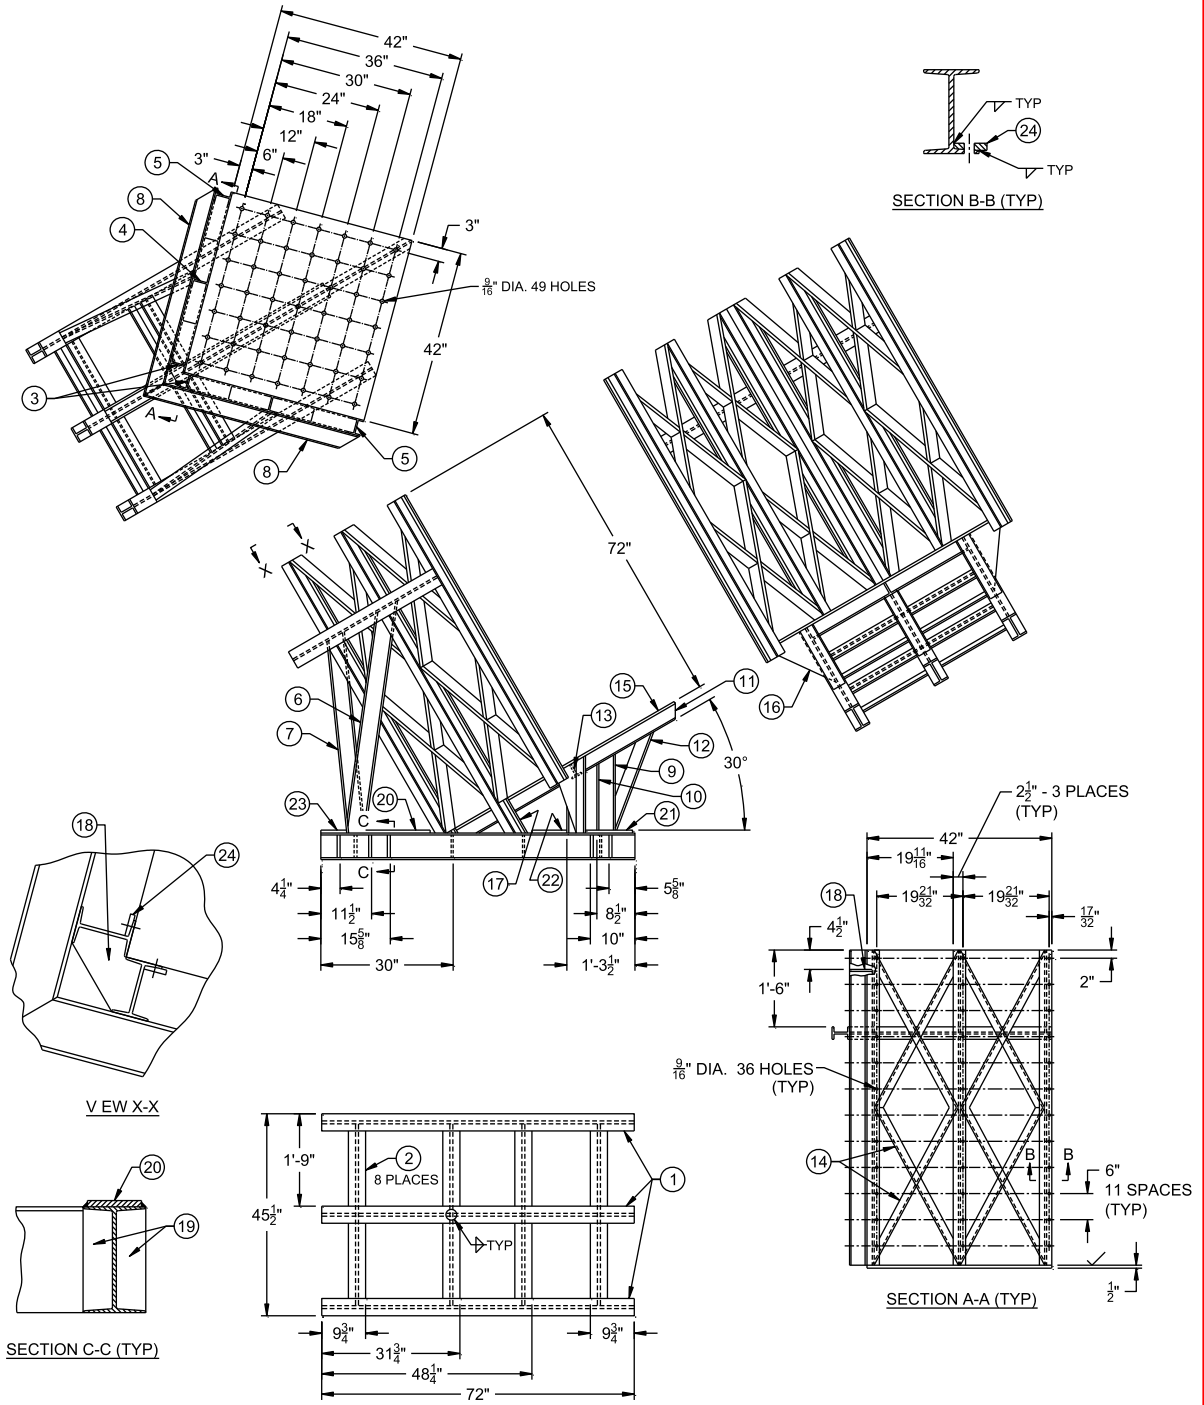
30-degree mounting fixture for testing back mounted equipment on the MWSM. (Sheet 1 of 5)
